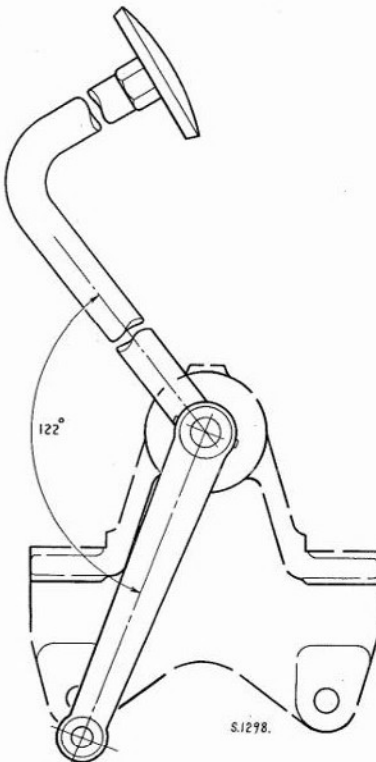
Accelerator pedal assembly, showing the angular disposition of the relay lever (R.H.D. Models)
